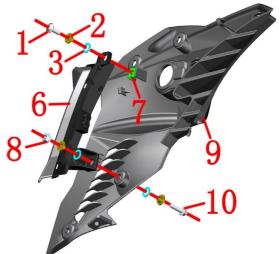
FUEL TANK COMPONENT		Fuel tank trim cover rear shell component 1	CHK	(0)
